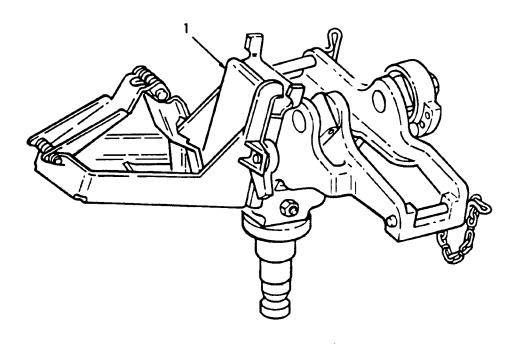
Mount, Machine Gun, Cal .50, 6650 7046650 (Assembled View).
